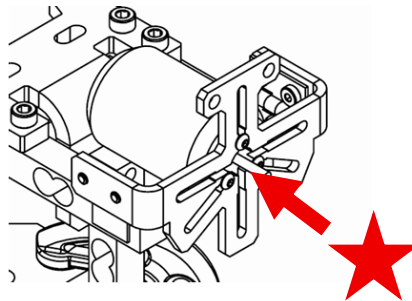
Mounting shown with 36 mm \varnothing and 53 mm length inrunner motor.
